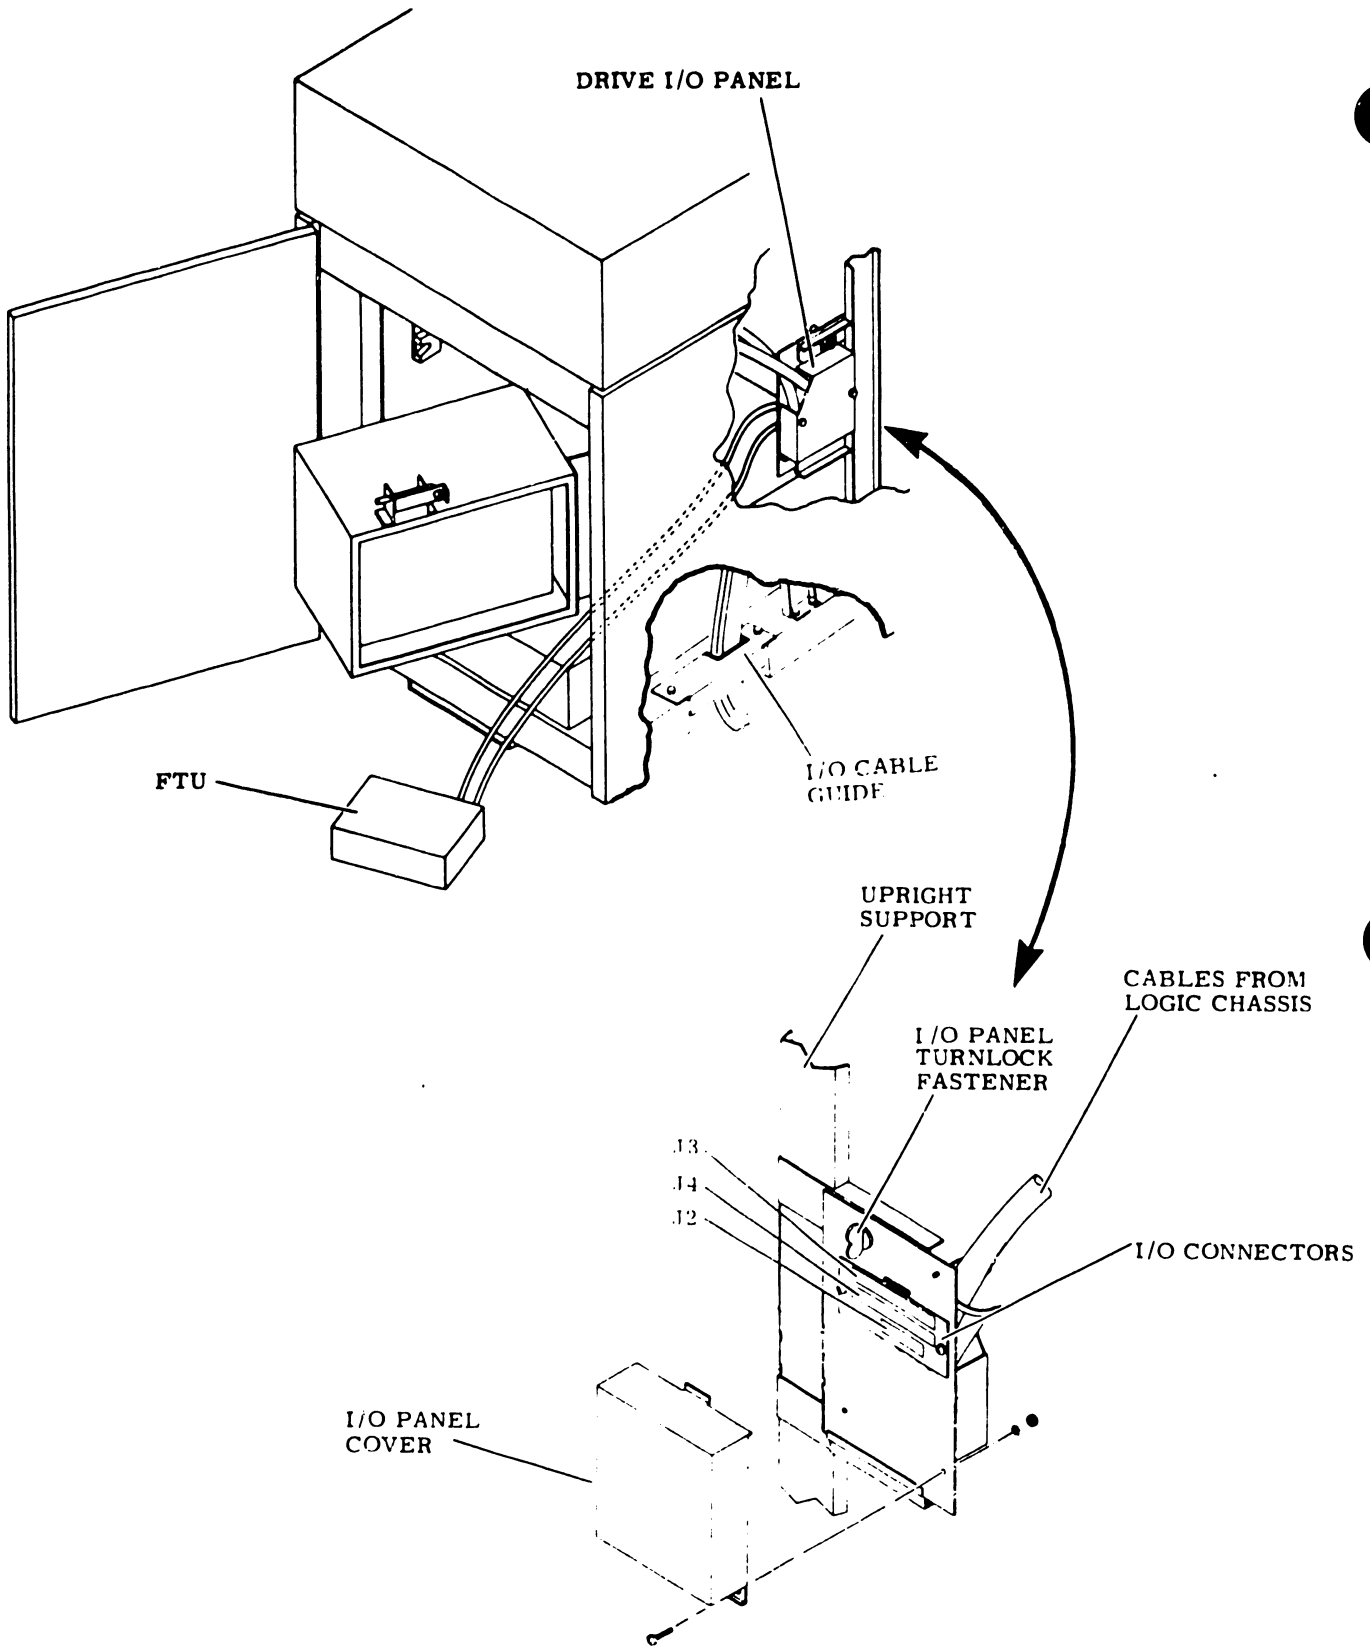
I/O PANEL AND I/O CABLE ROUTING
